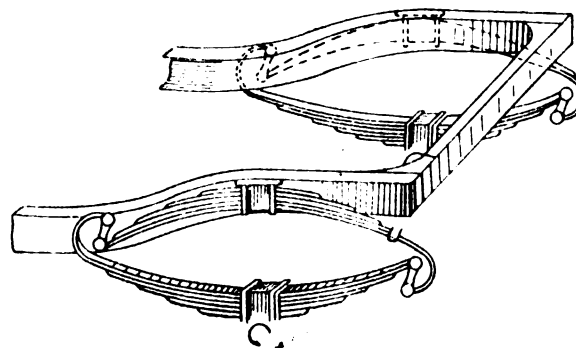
Rear Spring Arrangement on the La Buire Car.
